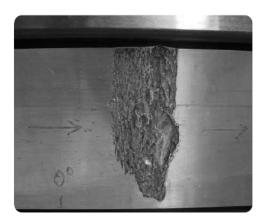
Damage on the inner race of one of the intermediate shaft support bearings. This was one of several spalls in the bearing.
